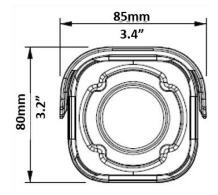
CB-3102-11-I Varifocal Frontal Dimensions
